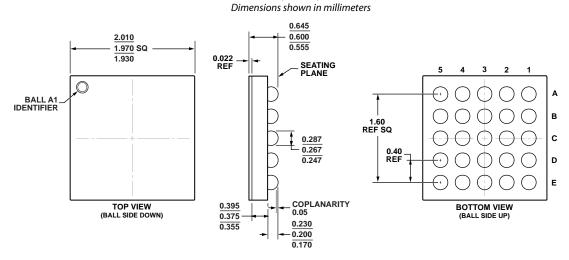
25-Ball Wafer Level Chip Scale Package [WLCSP] (CB-25-4) Dimensions shown in millimeters
